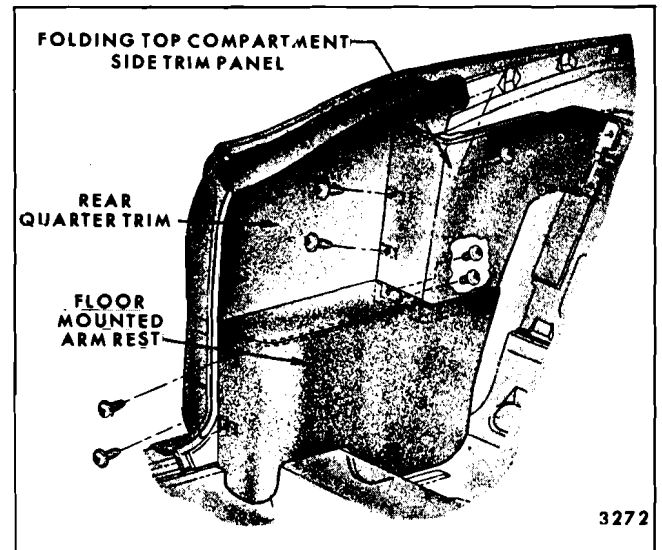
Rear Quarter Trim - "67" Styles - "A" Body Shown, "B-C" Body Similar
